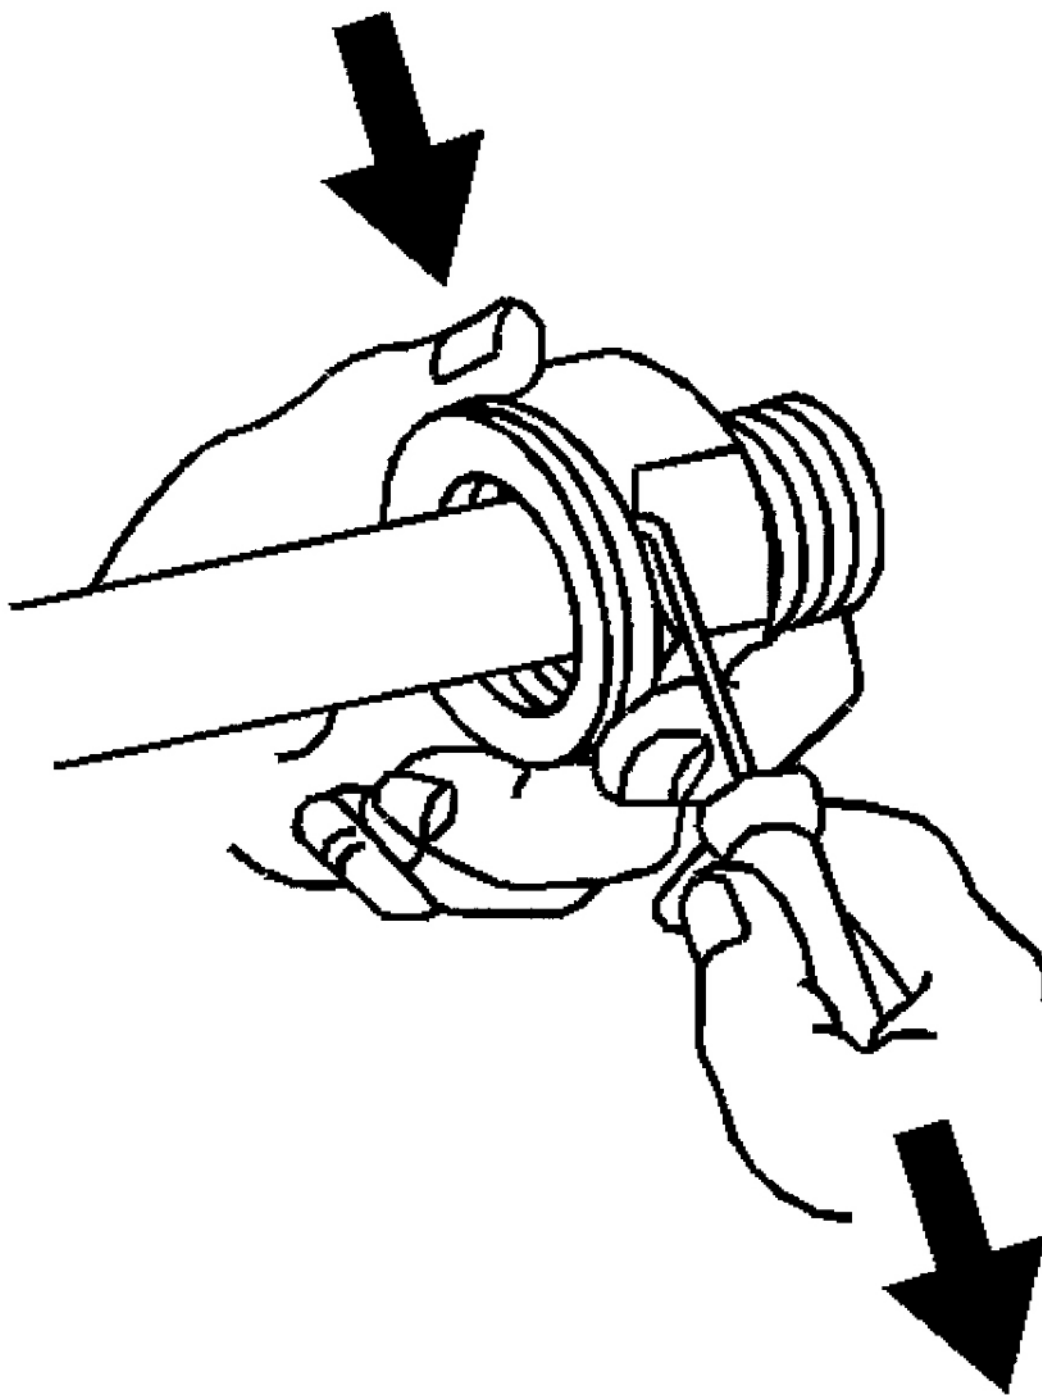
Removing & Installing Oil Cooler Lines At Oil Cooler
